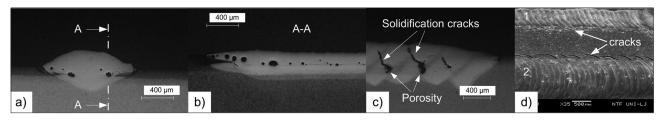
Porosities in duplex treated surfaces after laser welding; a) cross section, b) longitudinal section, c) weld solidification cracks in nitrided and CrN-coated sample, SEM micrograph of cracks along weld
